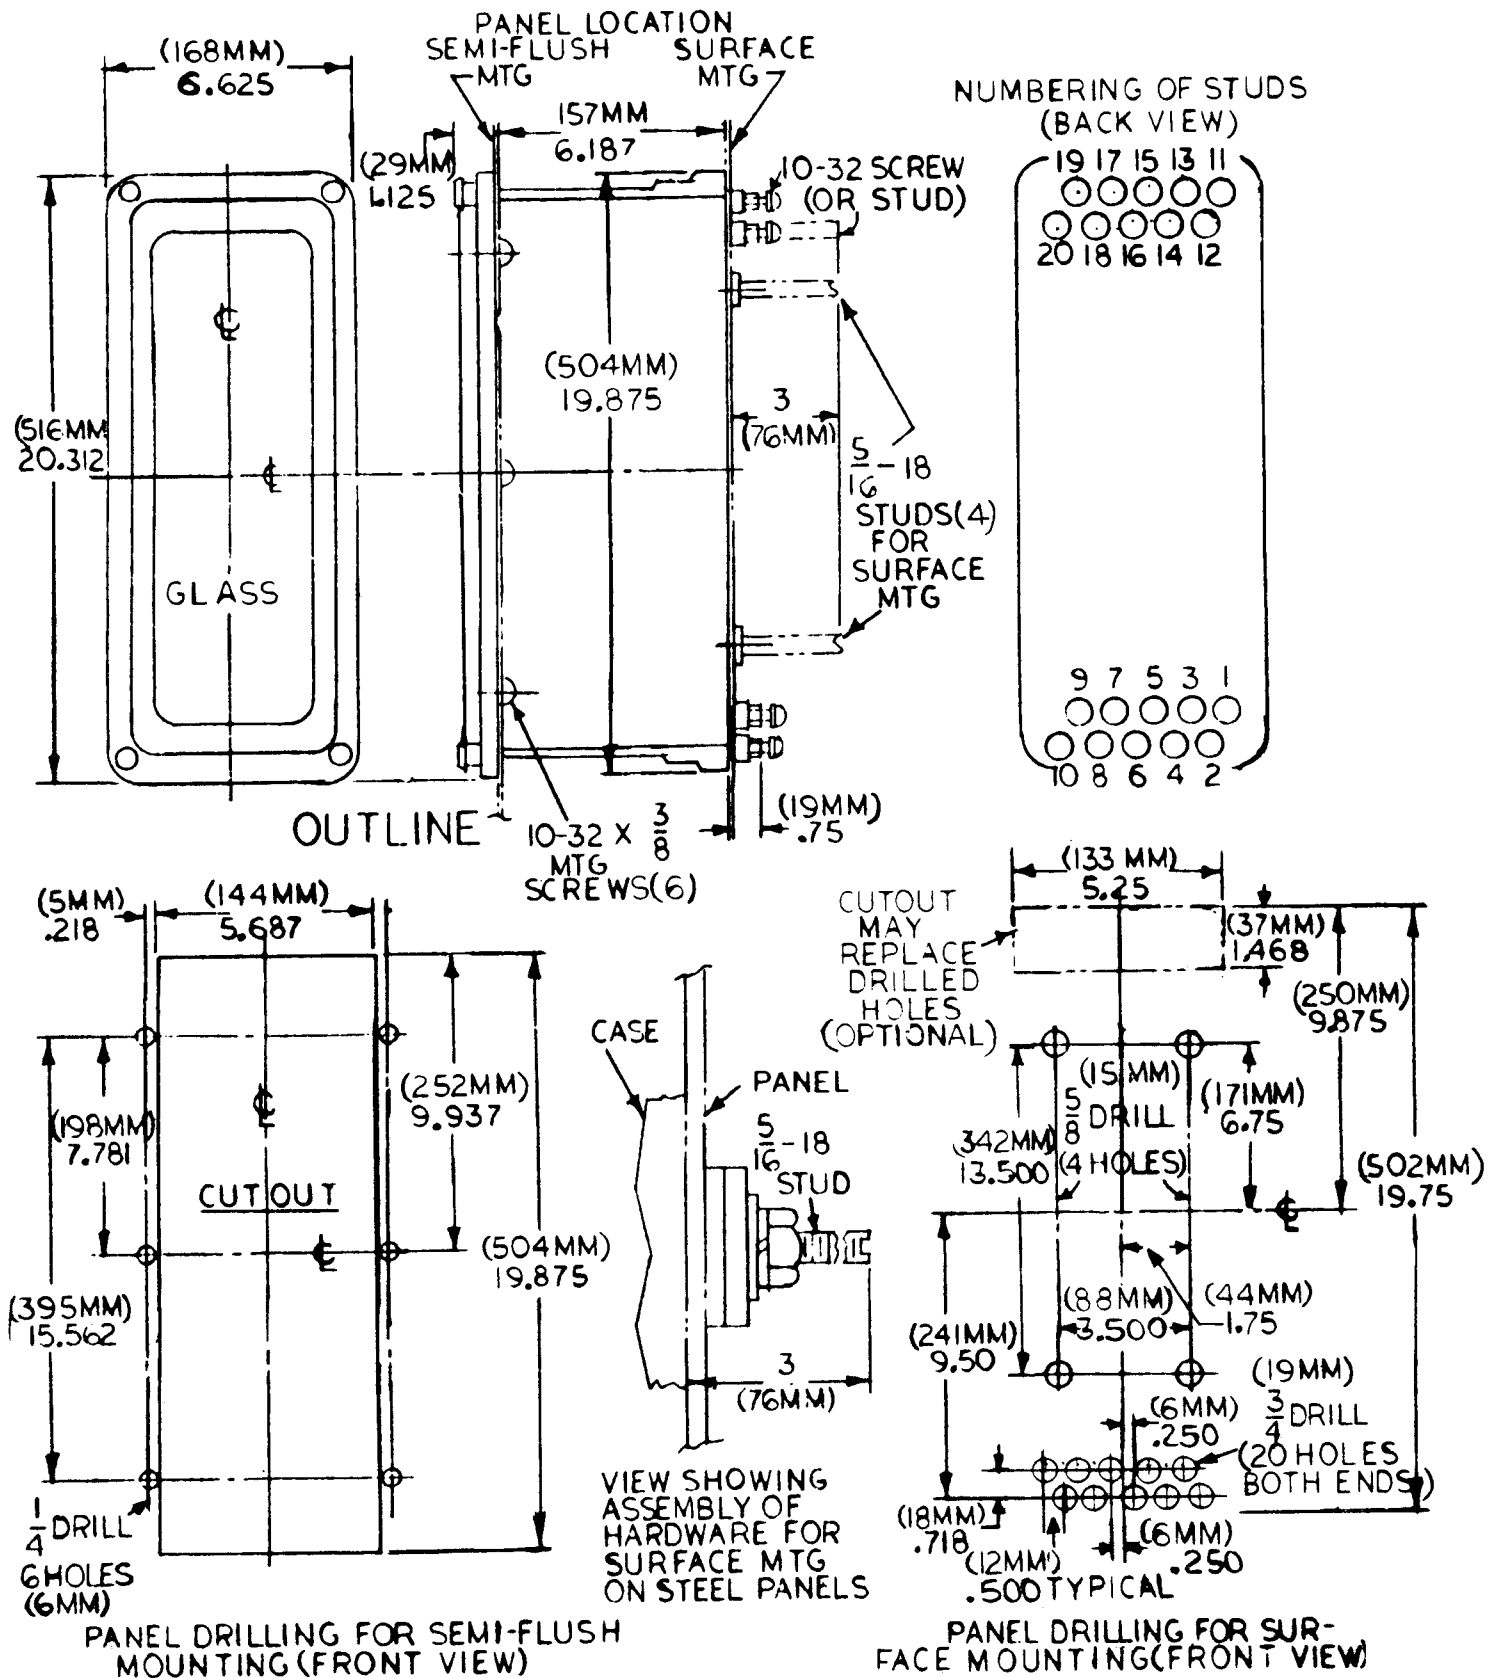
(6209276-3) Outline and panel drilling dimensions for type GCY51A relay
